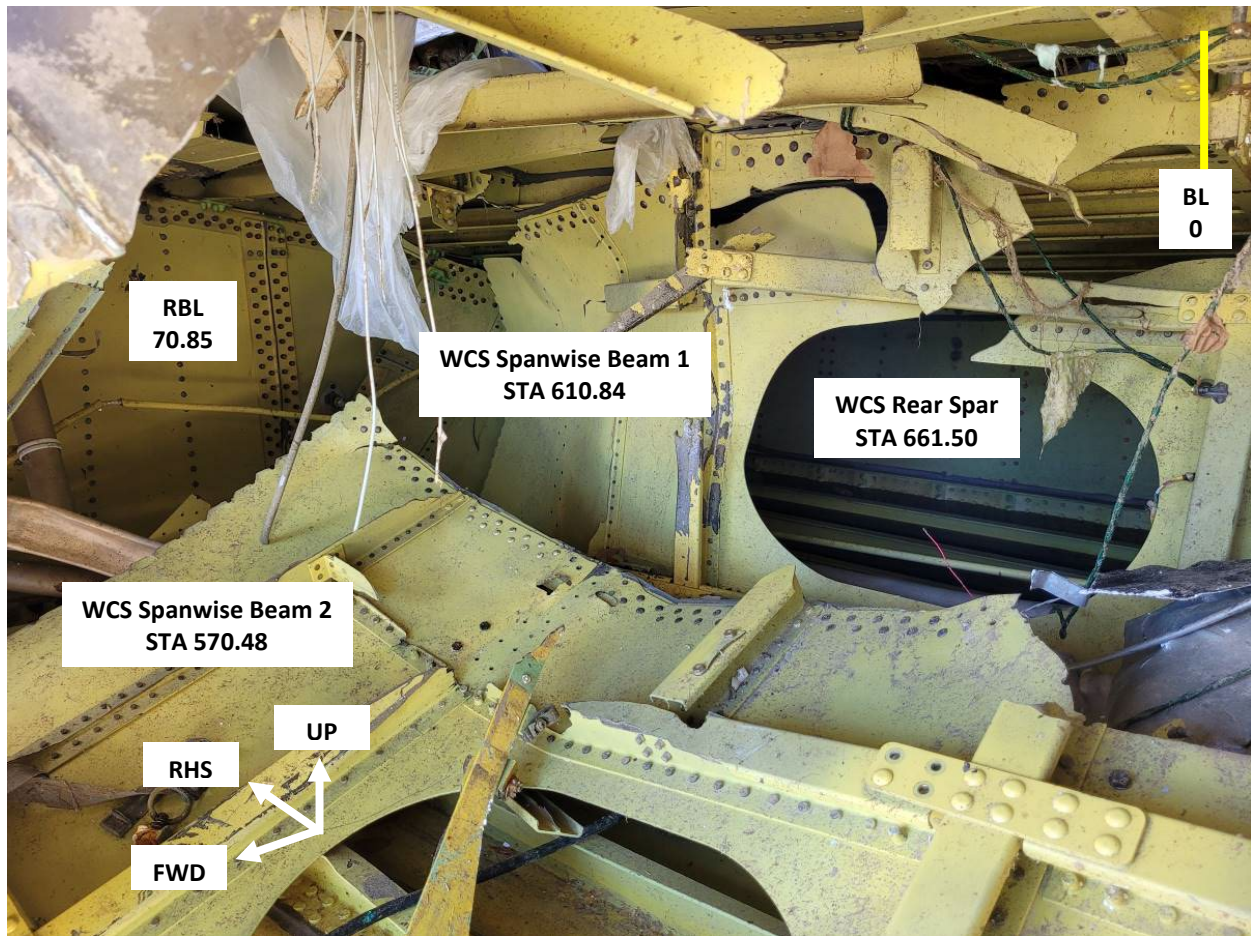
Damage to WCS Spanwise Beams 1 & 2 (Boeing photo)
